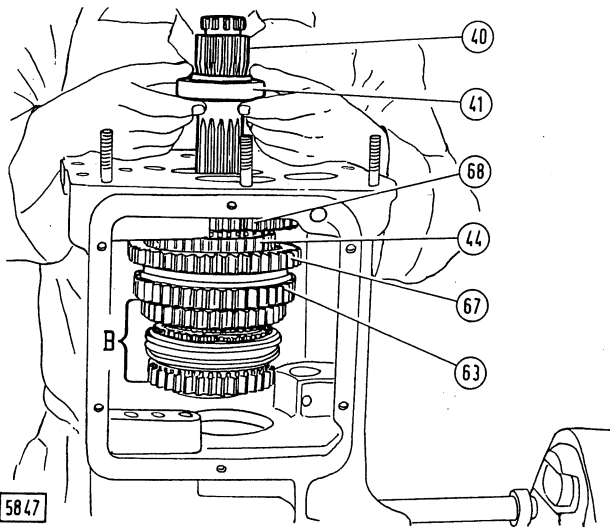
Installing the 8-speed transmission driven gears shaft (40).
